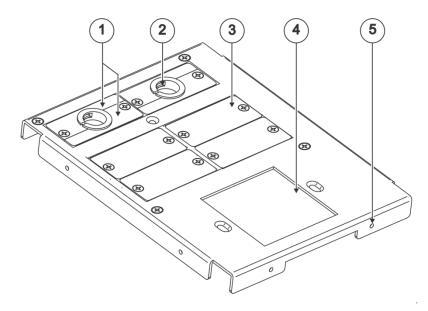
TBUS-1N Inner Frame (P/N: 80-000299)
